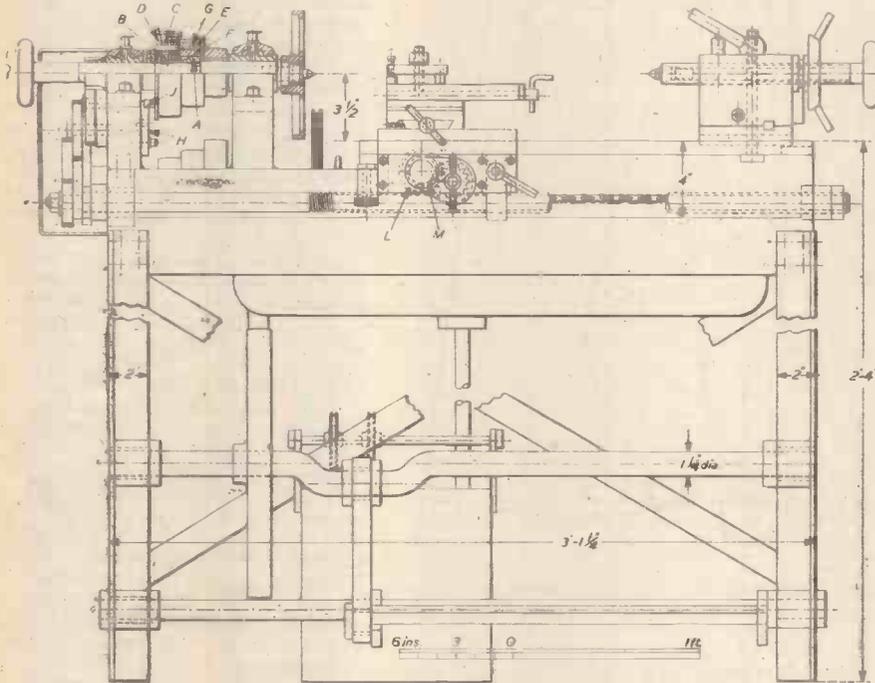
Front elevation of the prize-winning 3½ in. centre lathe.
